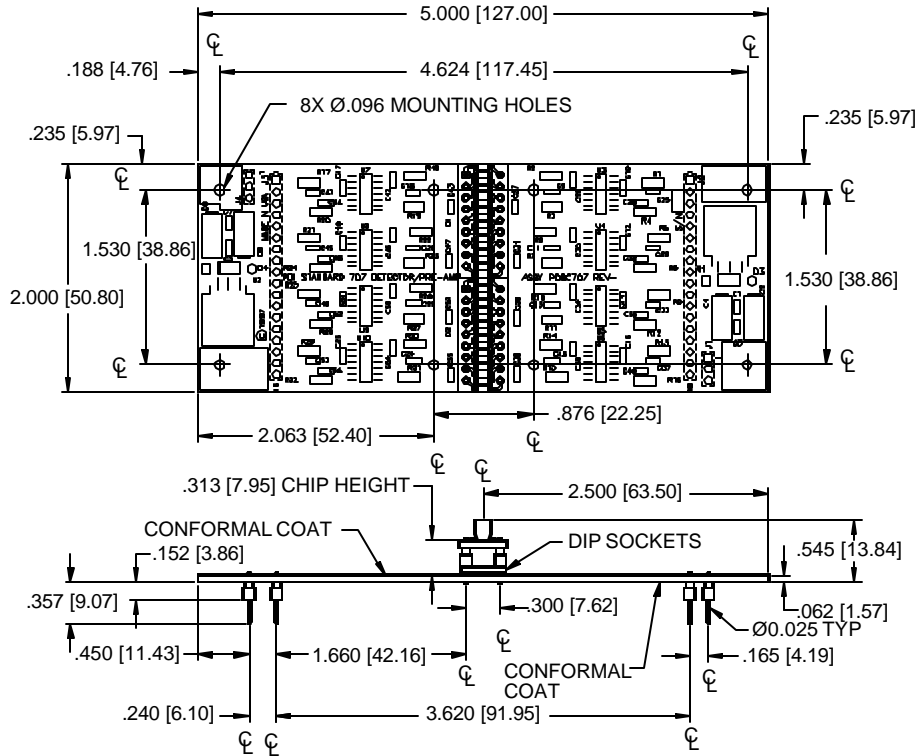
CHANNEL DETECTOR PRE-AMP BOARD ASSEMBLY
